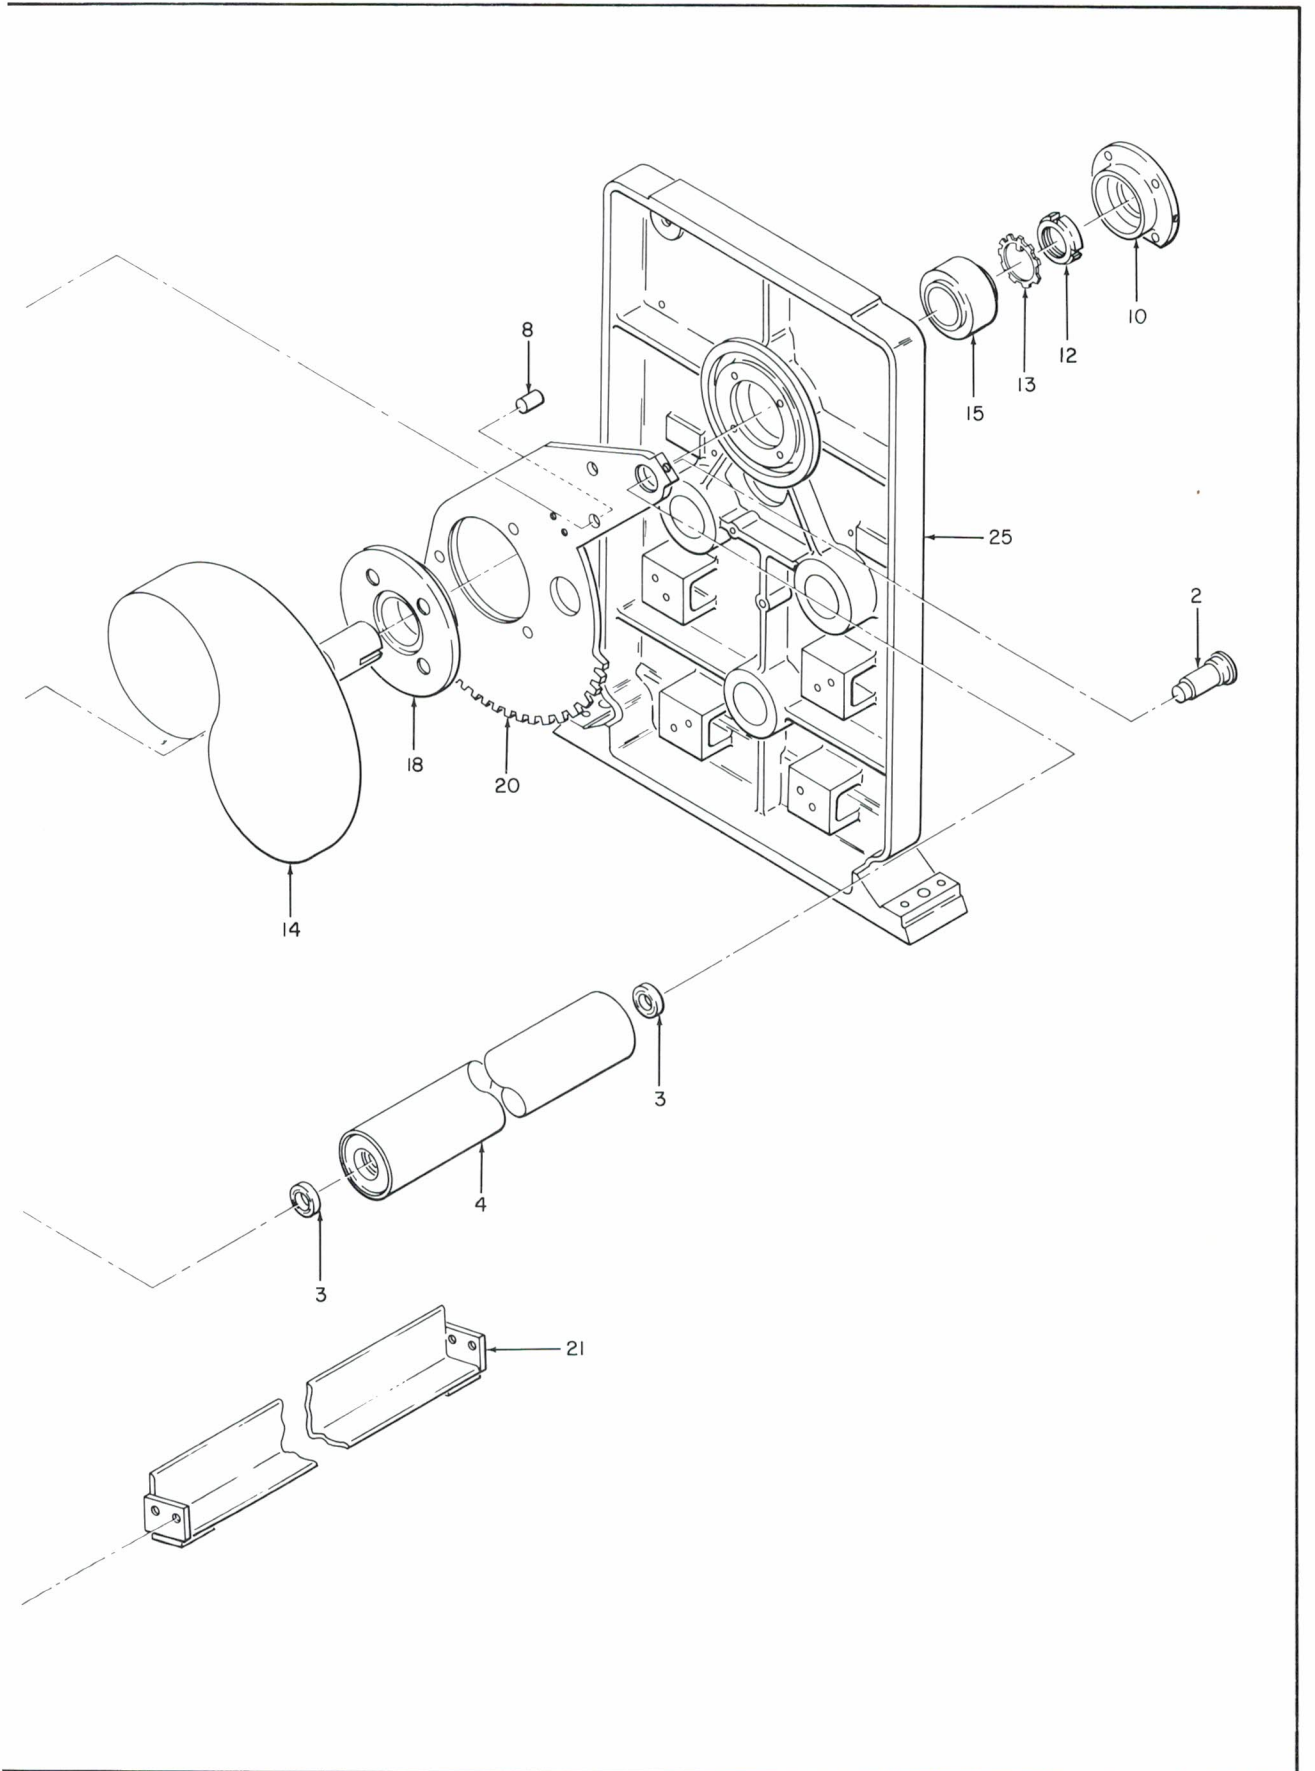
Frames, Braces, Drum and Wrap Rolls Assembly (Sheet 2 of 2)
